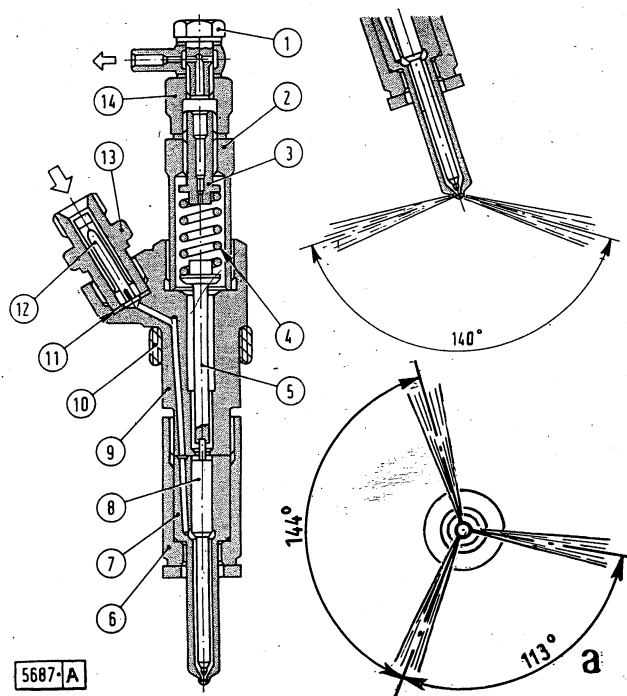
Injector cross-section and spray pattern. a. Nozzle spray pattern.
